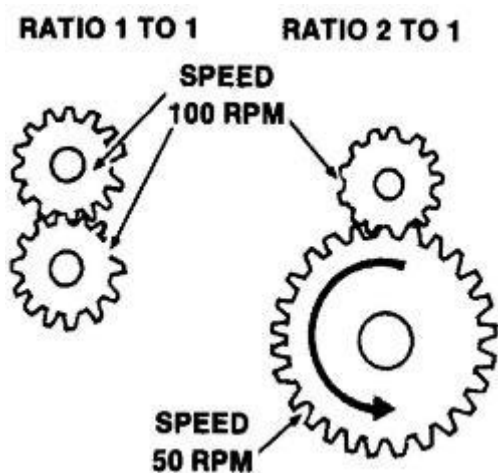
Schematic describing the concept of the gear ratio. The gear on top is the driver gear, the other one is the driven gear [67]
